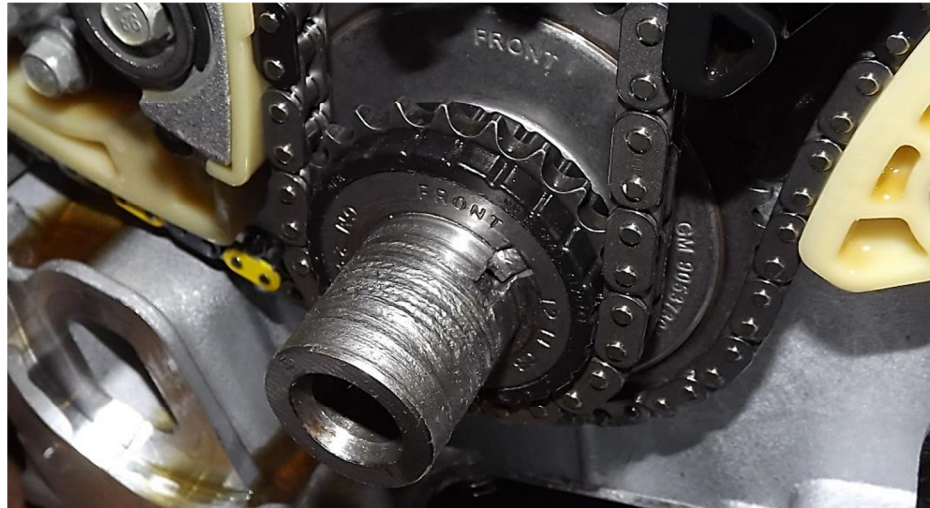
BAS-ICE Interface Mechanical Failure at Engine Crankshaft
